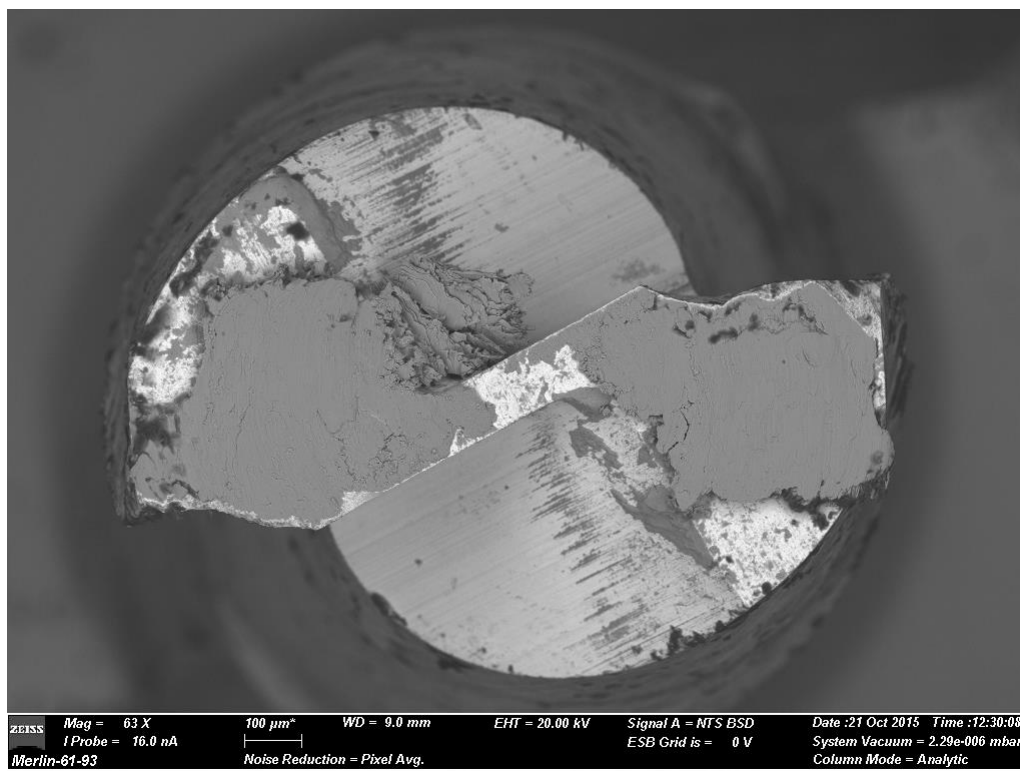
Experimental run 18: Tungsten carbide tool after machining with parameters $v_c=70.69$ [m/min], $v_f=827.03$ [mm/min] and $a_p=143.58$ [μm]
